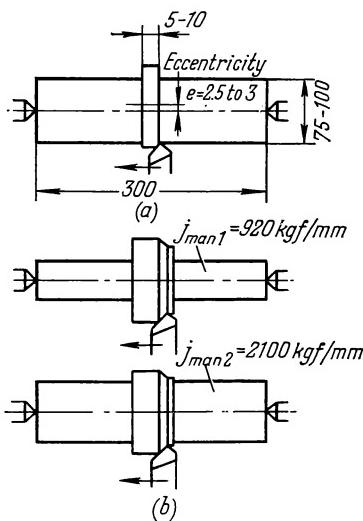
Kinds of blanks used to determine lathe rigidity in cutting
